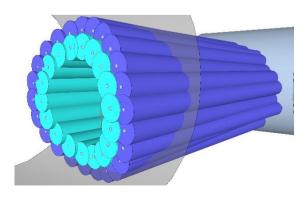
Stage 3b (Ring 2 and 3) (outer tube)
